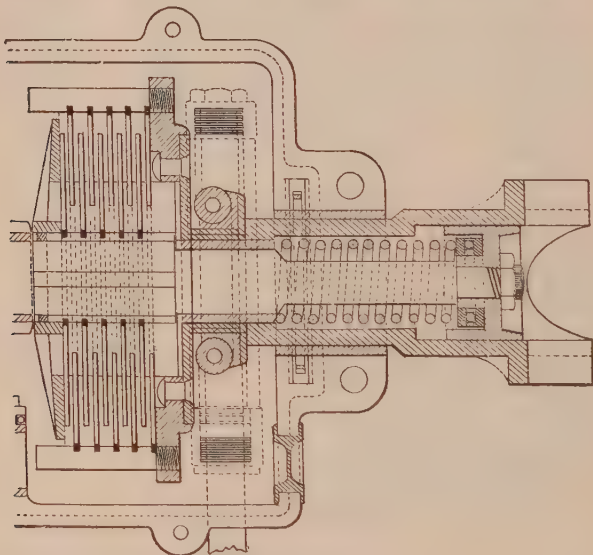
Multiple disc clutch; sectional view showing construction.
